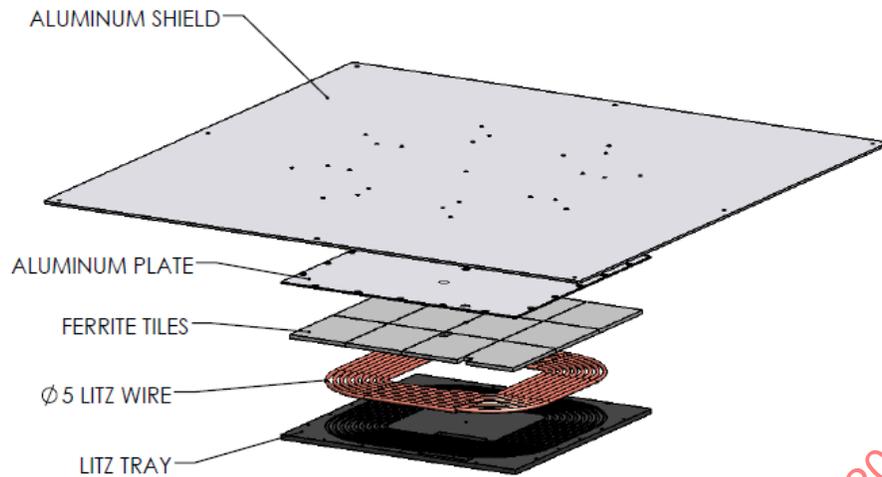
Exploded view of the Test Station VA WPT3/Z2
